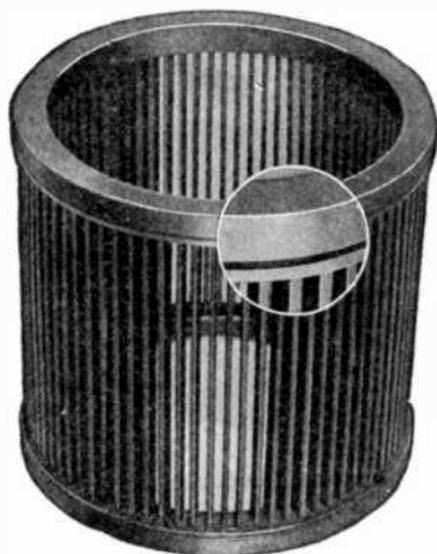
,700.—Appearance of Fairbanks-Morse squirrel cage if it could be removed from the core. The enlarged section shows the inspection groove cut in the end ring to prove the solidity of construction.
